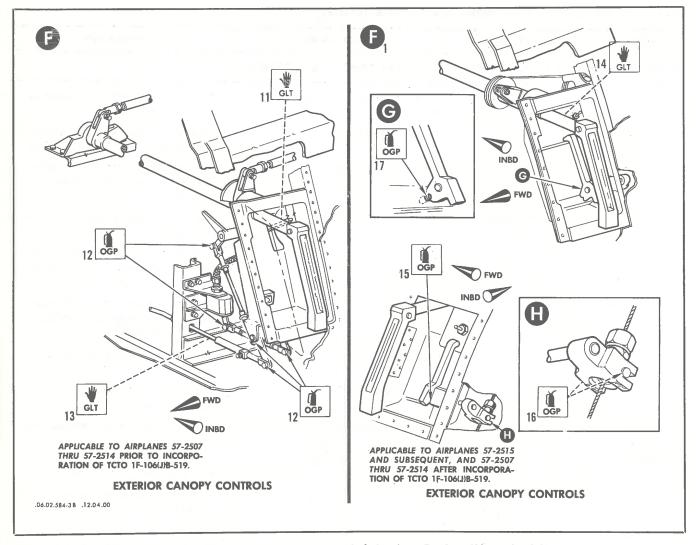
Canopy Components Lubrication, F-106B (Sheet 3 of 3)
